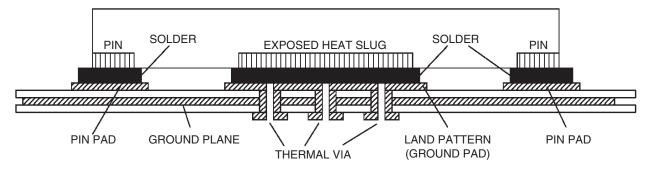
P.C. Assembly for Exposed Pad Thermal Release Path - Side View
